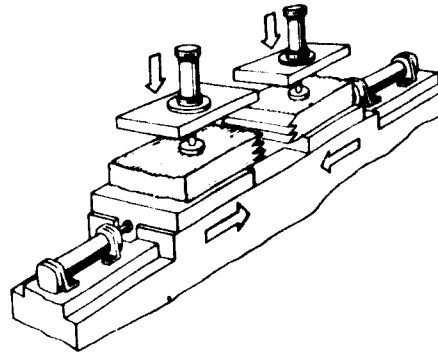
b - Jointing press for finger jointed pieces. Finger joints one side fixed one side driven (a) both sides driven together (b).
